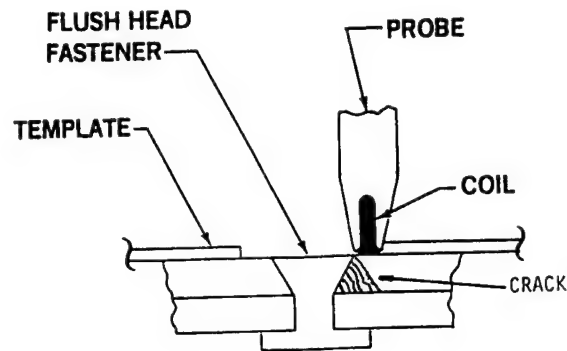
Short Fatigue Crack Under Flush-Head Fastener.
